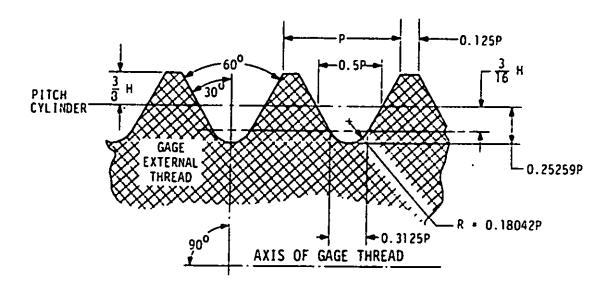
C.5 <u>External thread profile full form</u> for thread gages
